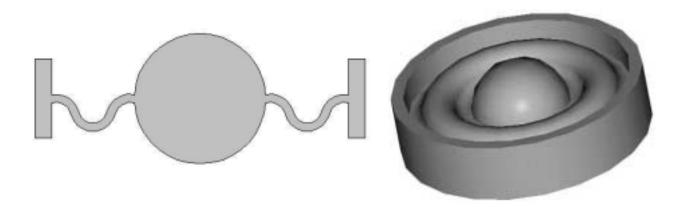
Spherical Test Specimen (Cross Section and Isometric)
